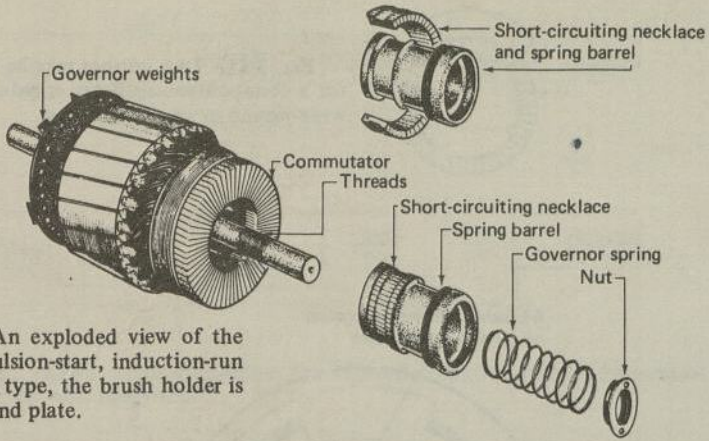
An exploded view of the rotor of a repulsion-start, induction-run motor. In this type, the brush holder is located in the end plate.
